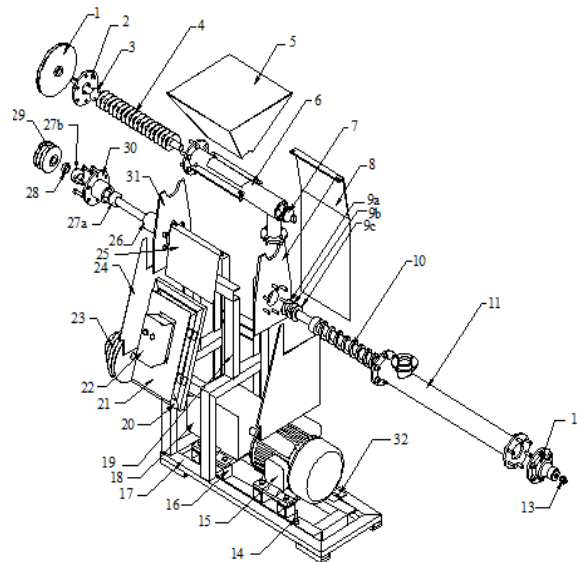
The exploded drawing of the extruder (LEGEND: 1 -Conveyor pulley, 2- Flange, 3-Bearing, 4- Conveyor, 5- Hopper,6-Conveyor Housing, 7- Housing Plug, 8- Rear Cover Sheet, 9-Thrust bearing, 10-Extruder worm, 12-Die, 13-Nozzle,14-Belt Adjuster,15-Electric Motor,16- Gear Sea, 17- Base Frame,18-Gear Box,19-Main Frame, 20-Panel Frame, 21-Panel Cover Sheet, 22- Control Switch, 23-Driver Pulley, 24-Side Cover Sheet, 25-Front Cover Sheet, 26-Shaft with Cup, 27-Taper Roller Bearing, 28- Lock Nut, 29- Extruder Pulley, 30-Hub, 31-Hub Support Plate, 32-Hinge).
